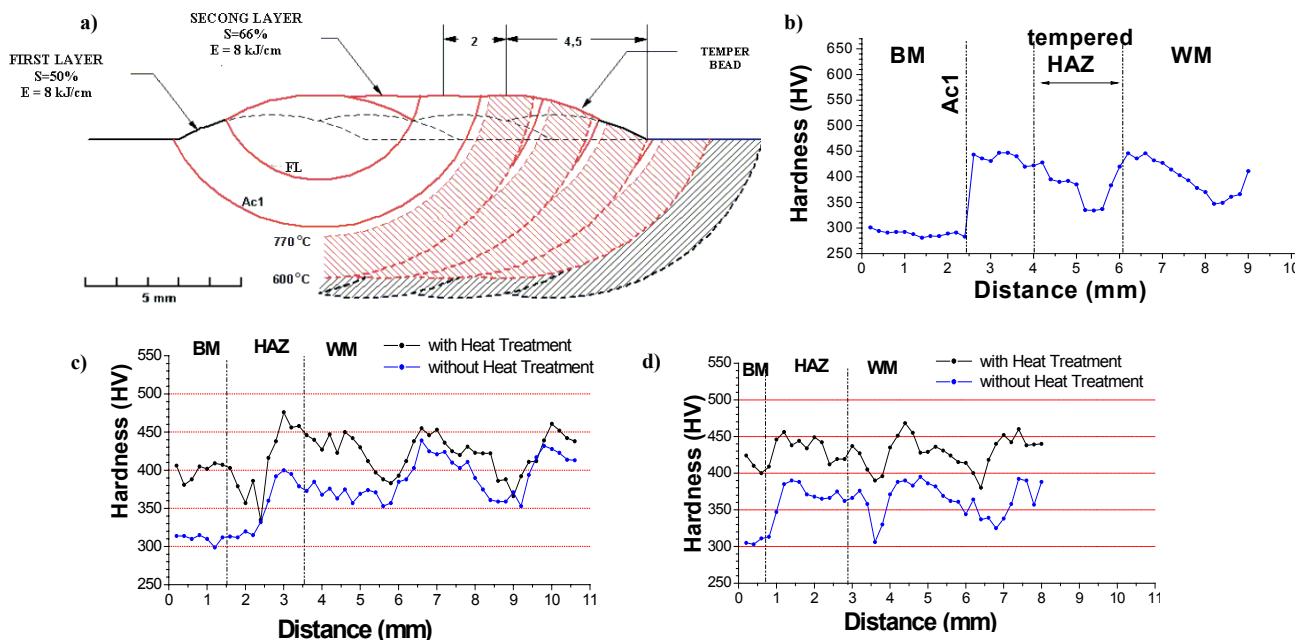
Hardness variation on polished surface after multipass welding: a) Multipass welding procedure for P20; b) welding of P20; c) VP50IM dissimilar; d) VP50IM similar
